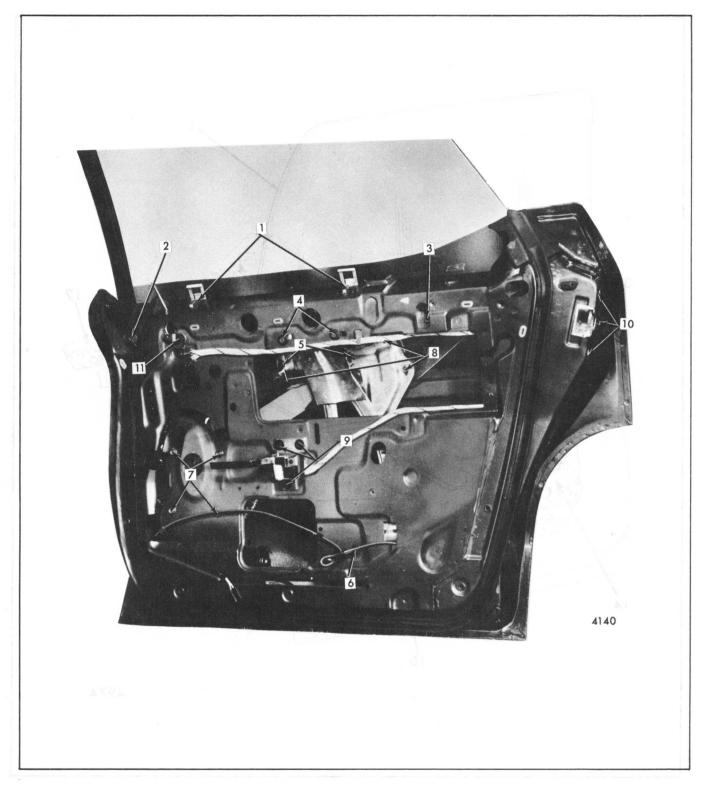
Rear Door Hardware Attachments - "B and C-39 and 49" Styles
